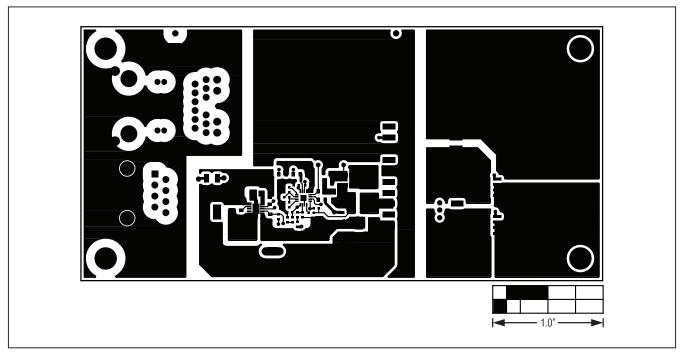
MAX5974A EV Kit PCB Layout—Component Side
